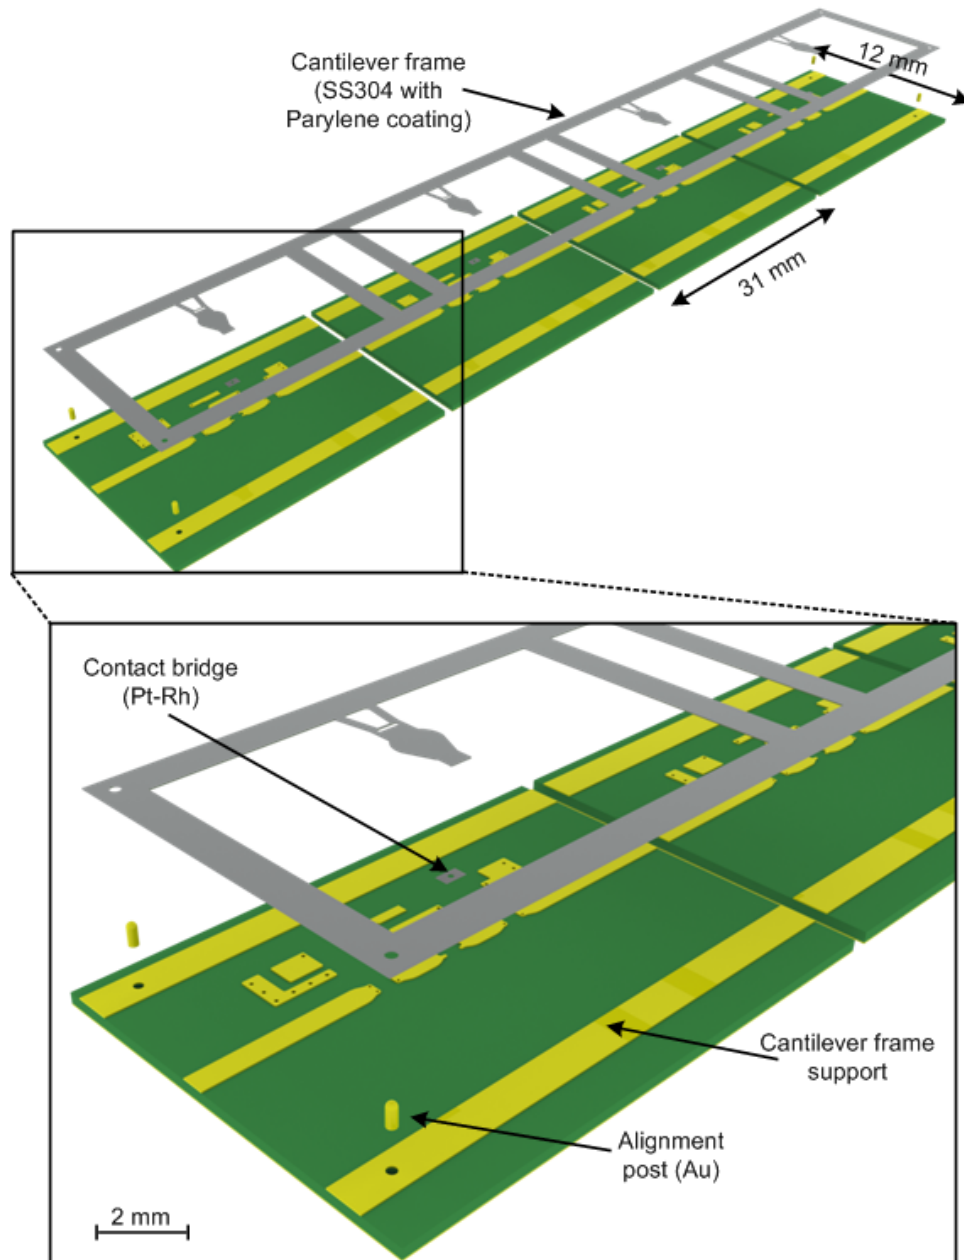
Exploded view of the 4×1 array batch micro-relays. Individual Pt-Rh contact bridges are placed on a Parylene coated steel cantilever frame which carries four cantilevers. Gold posts align and hold the cantilever frame on a multi-layer PCB.
